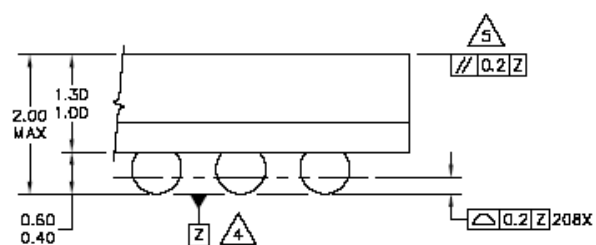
208 MAPBGA package mechanical drawing (1 of 2)
